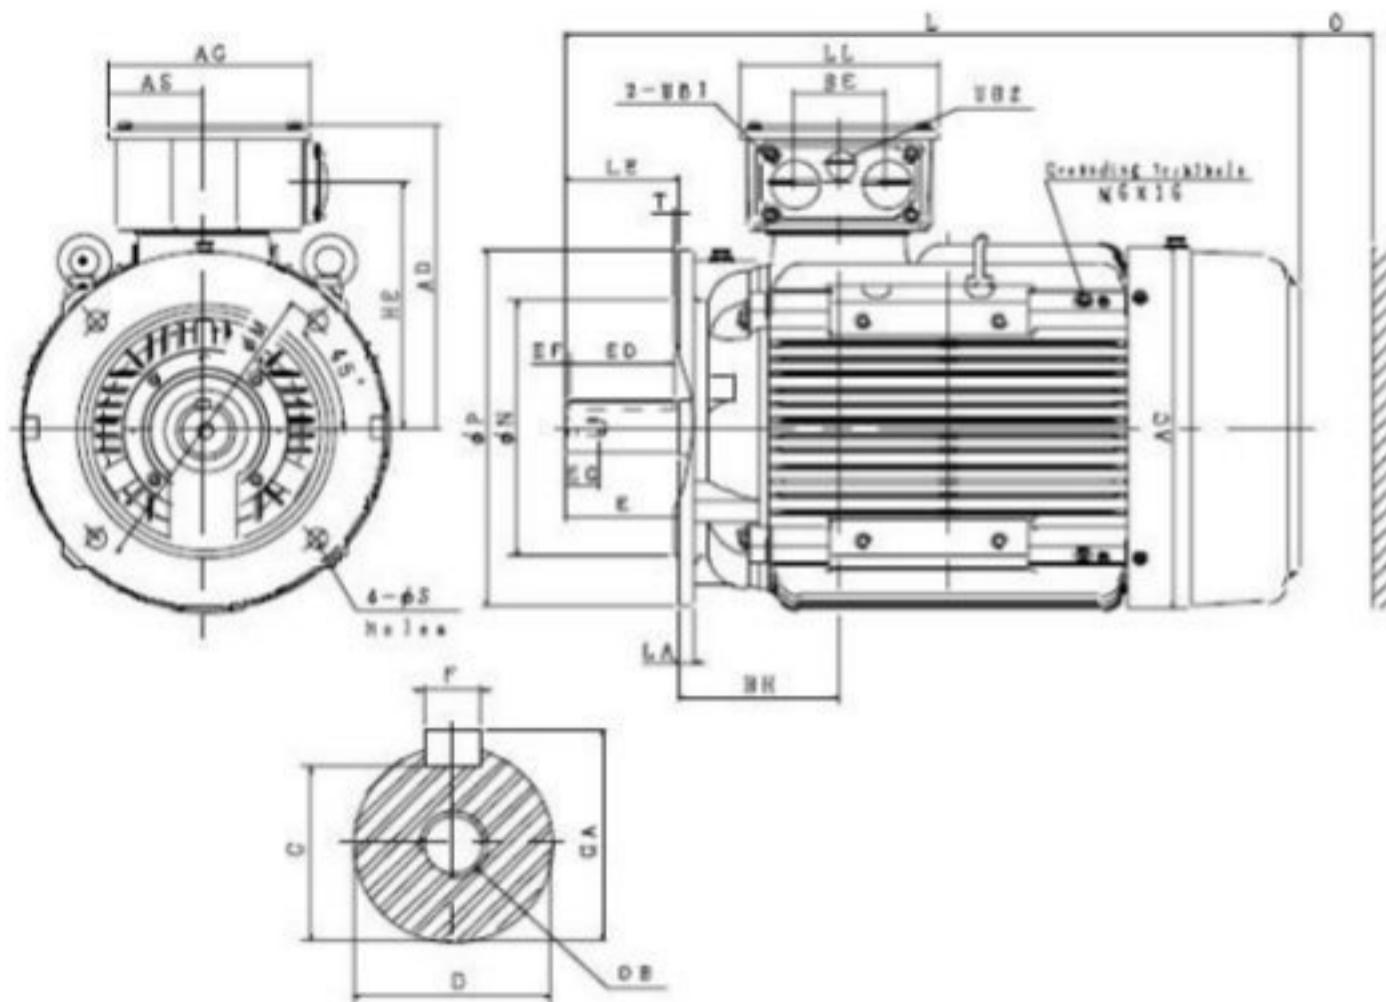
Outline drawing of cast iron design, flange version, mounting B5, frame size 200
